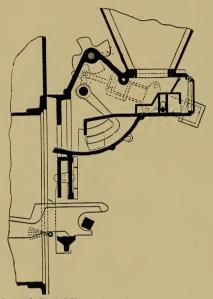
Section of Sprinkling Shovel Arrangement; Ransome and Rapier's Stoker.
